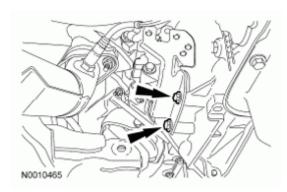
Locating Selector Lever Cable Bracket Bolts Courtesy of FORD MOTOR CO.
